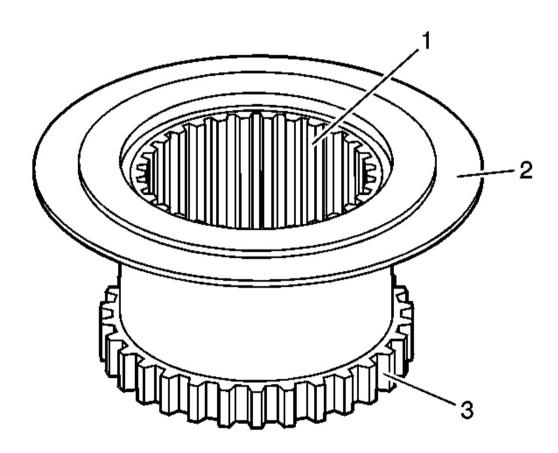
Identifying High/Low Range Shift Sleeve Inspection Areas Courtesy of GENERAL MOTORS CORP.
